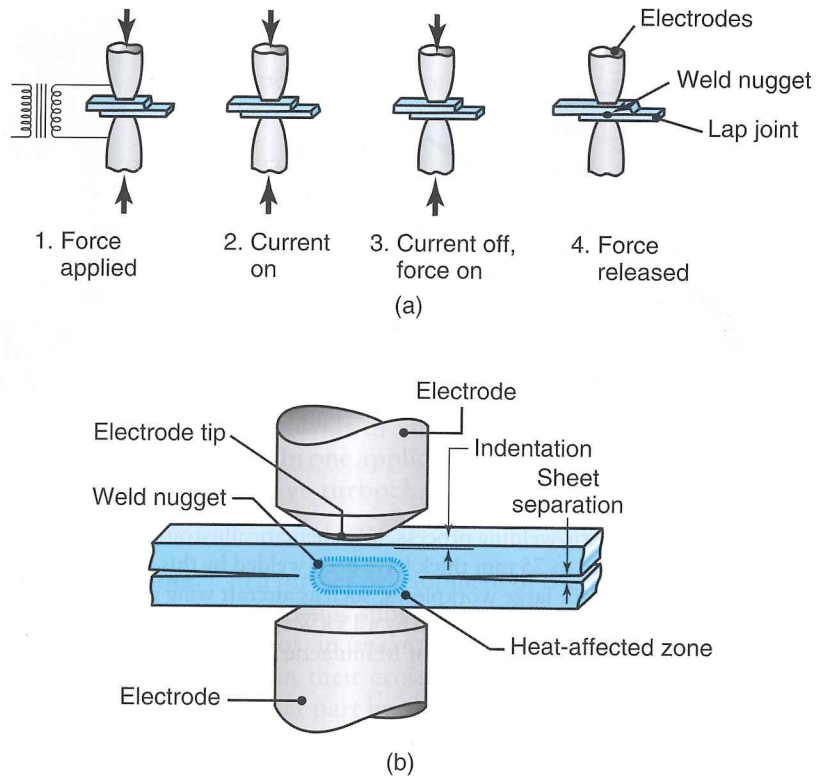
(a) Sequence of events in resistance spot welding of a lap joint. (b) Cross-section of a spot weld, showing the weld nugget and the indentation of the electrode on the sheet surfaces. This is one of the most commonly used processes in sheet-metal fabrication and in automotive-body assembly.
